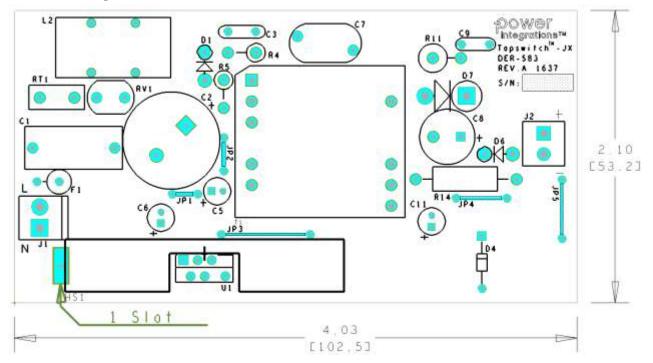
Printed Circuit Layout, Showing Top Side Components.
